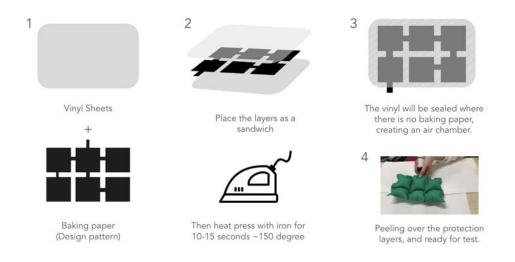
Fabrication process, starting from top-left corner (1) to bottom-right corner (4)
